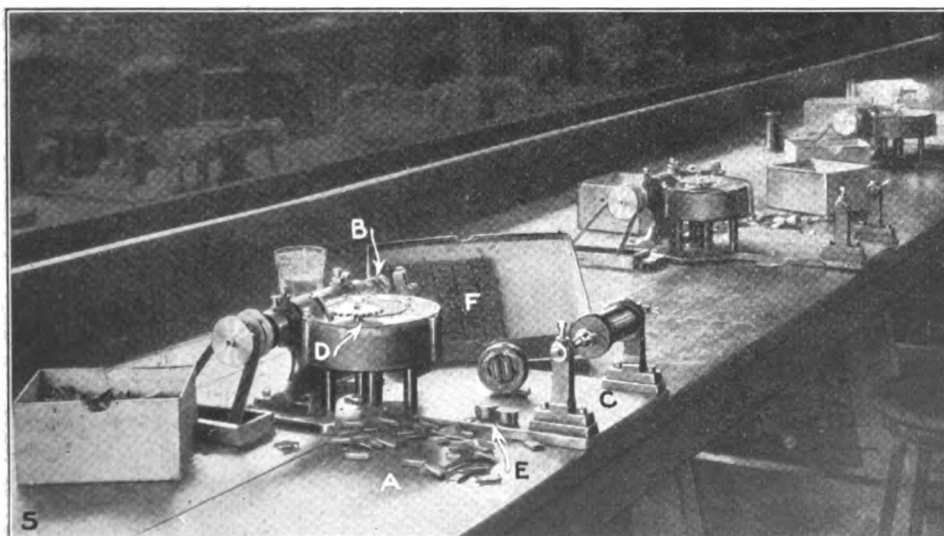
WINDING THE MAGNET COILS. FIG. 6—PUTTING THE COILS IN PLACE
